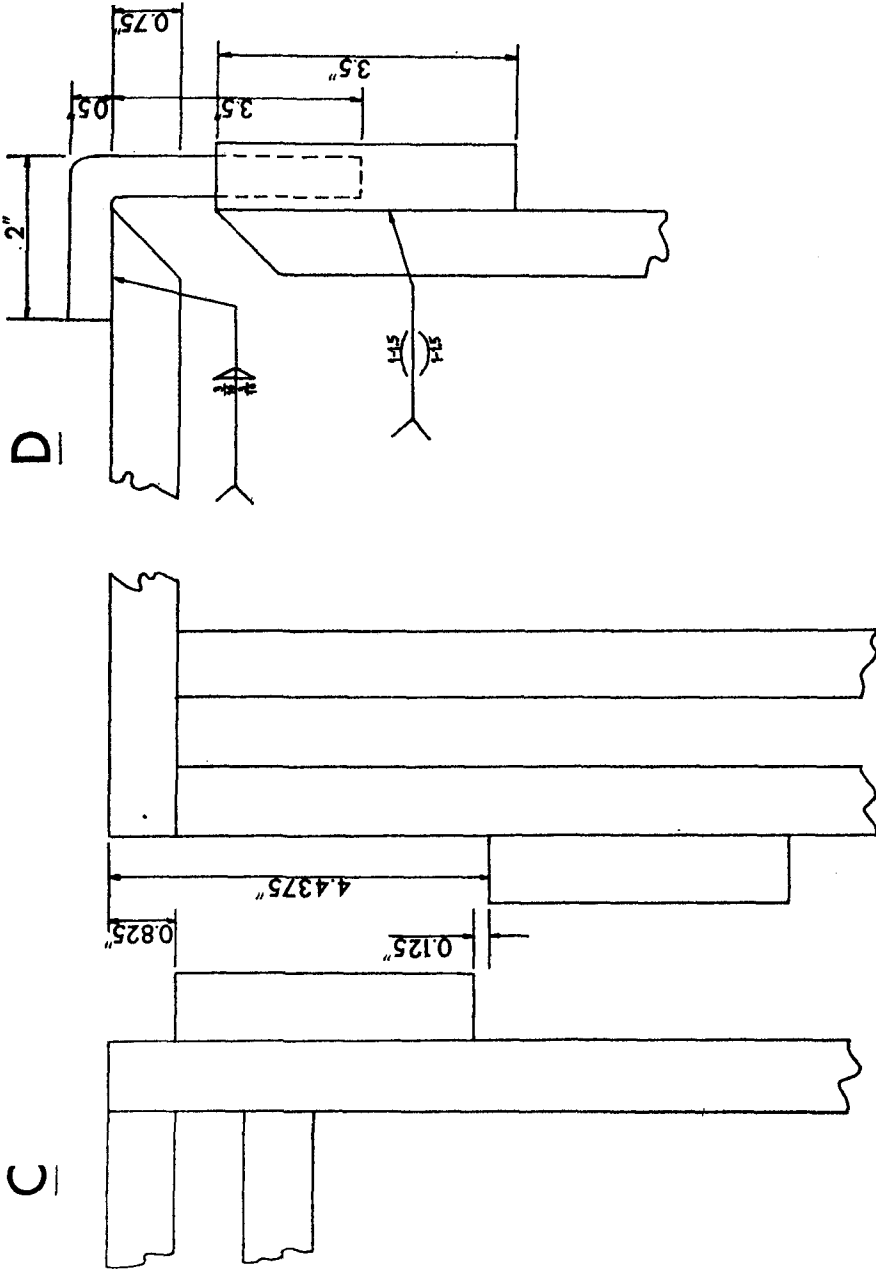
Details C and D. Schematic diagram of rod and link attachment showing black pipe spacing and link tolerance (Detail C) and rod and link attachment for top of door frame (Detail D).
